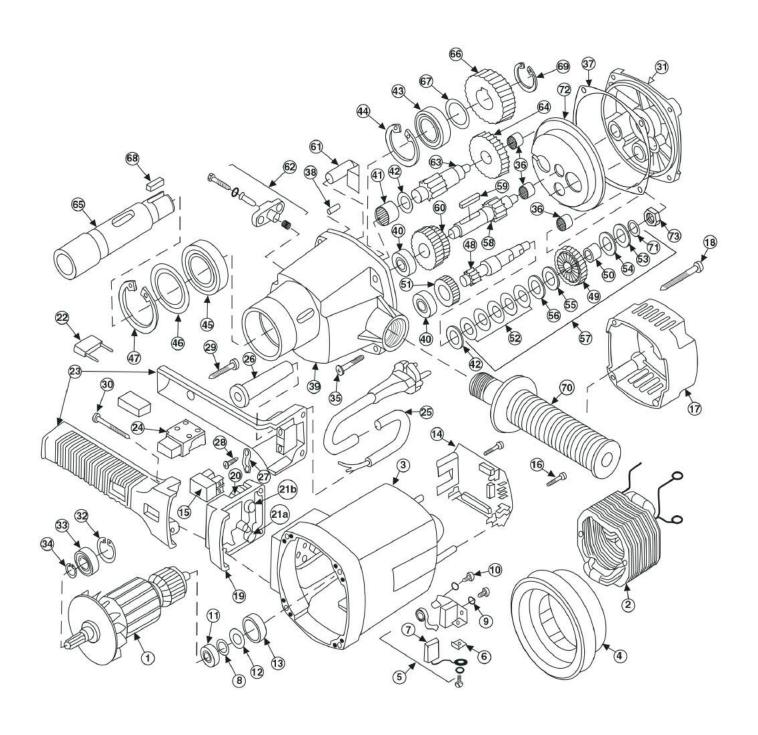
ELECTRIC MOTOR ASSEMBLY (P/N 2110110, 120v - 2110220, 230v)
